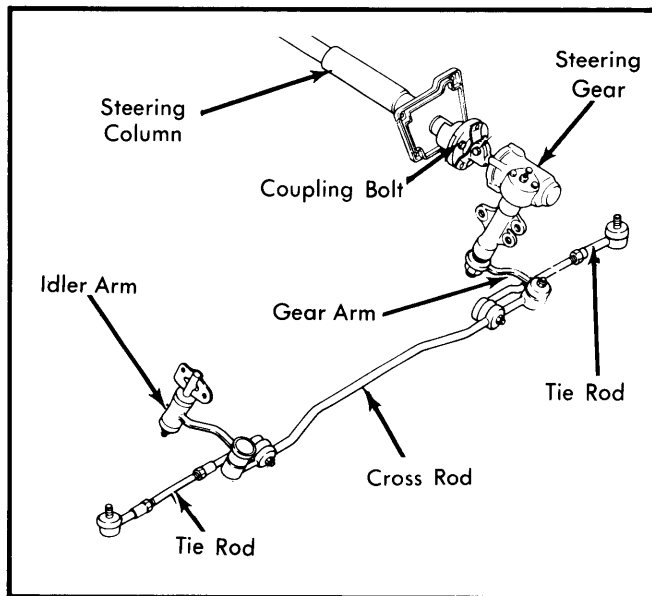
Datsun Steering Gear Linkage (210 Shown, Others Similar)
